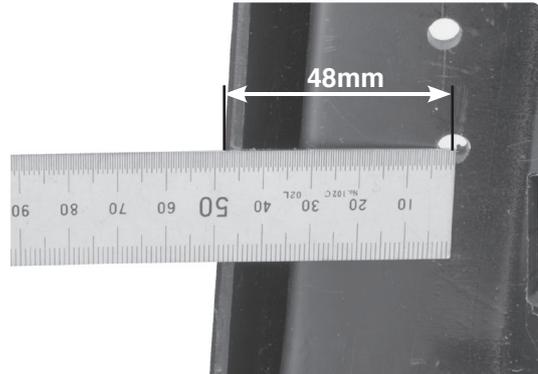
The lower hole should be positioned 48mm. from the edge of the Back Rest. \varnothing 6,5mm.
